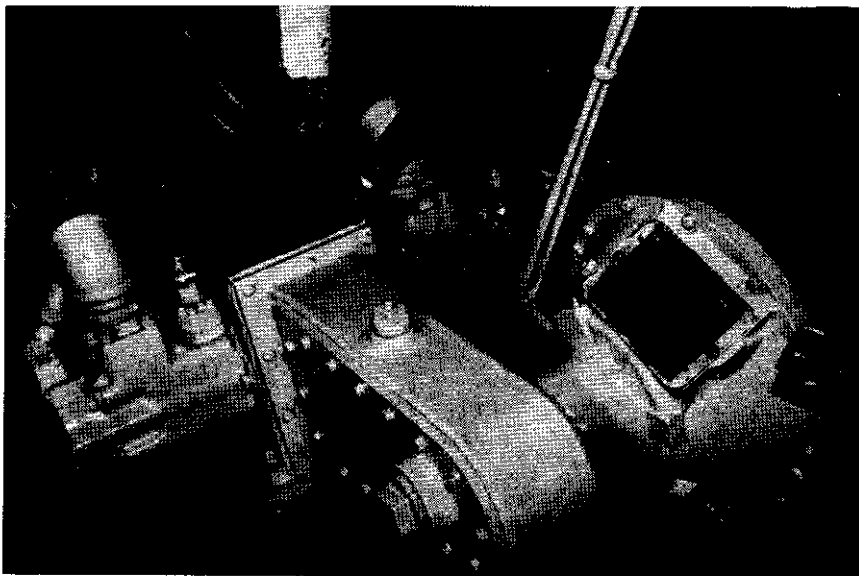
Two double hydraulic pumps mounted on a common base driven from the main engine front power takeoff with roller chain drive in an oil bath (approximately 100 hp).
